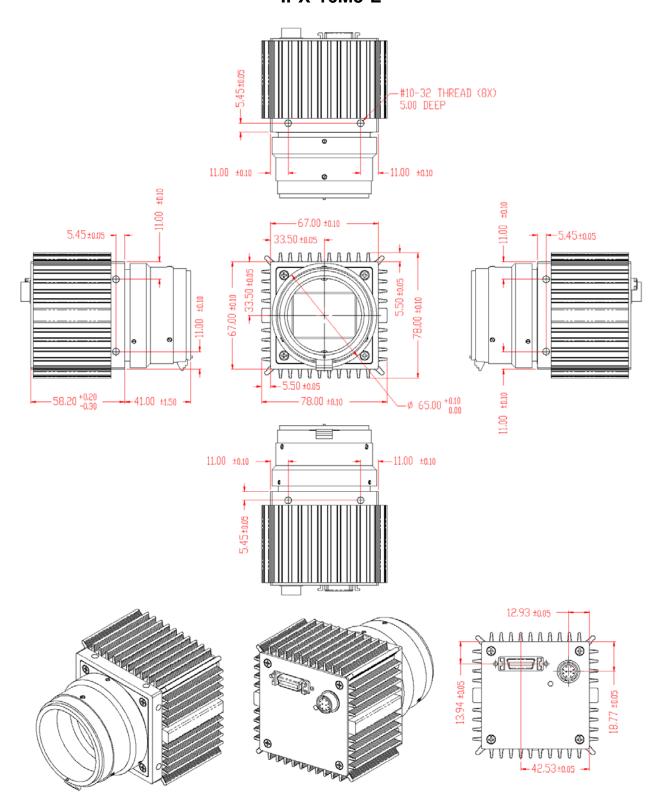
IPX-16M3-L Dimensional Drawings
